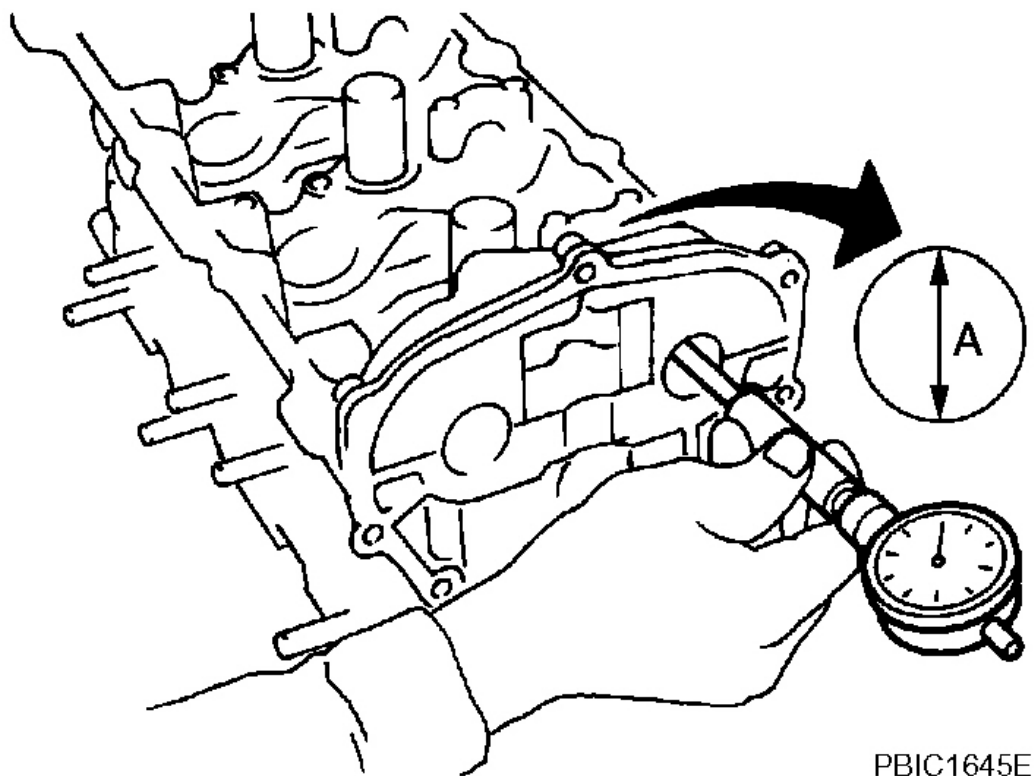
Identifying Inner Diameter Of Camshaft Bracket With Bore Gauge
